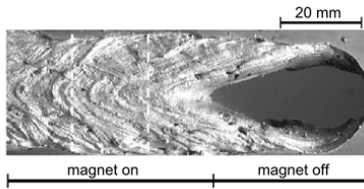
Full-penetration welding of 30 mm thick AlMg3 with magnetic weld pool support (left) and without (right).
